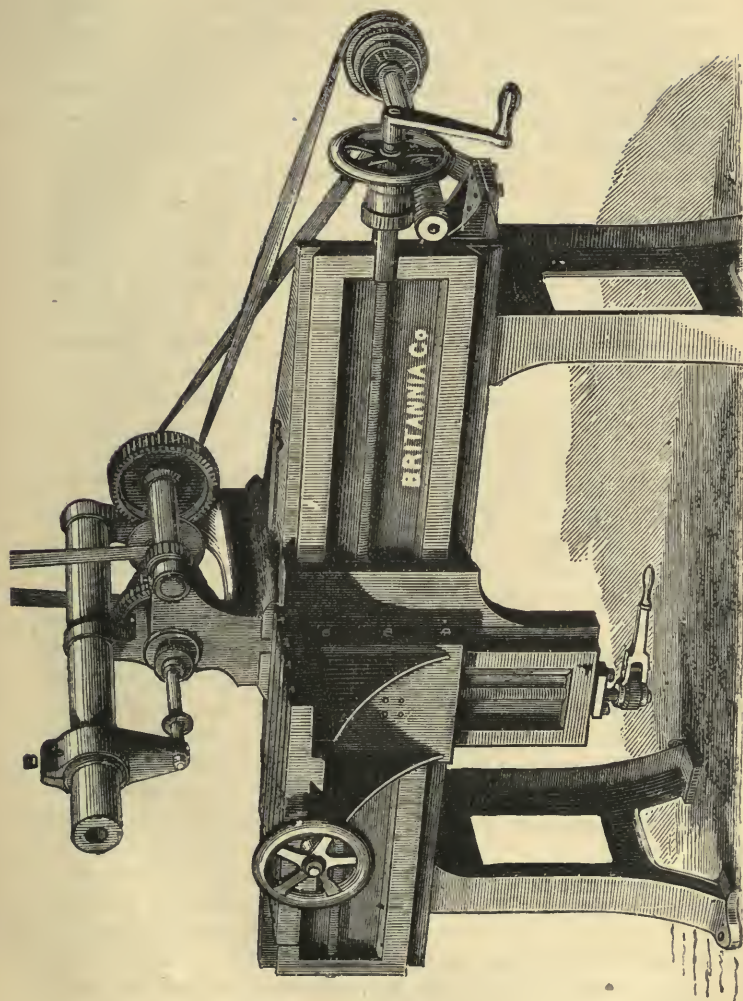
NEW UNIVERSAL MILLING MACHINE.
